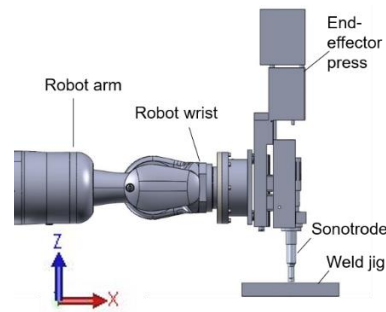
Schematic side view of the robot welding equipment (global frame of reference indicated)
